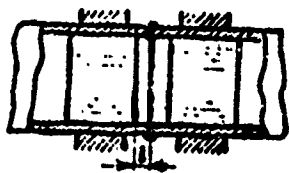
Welding of tubular parts with installed plugs.
